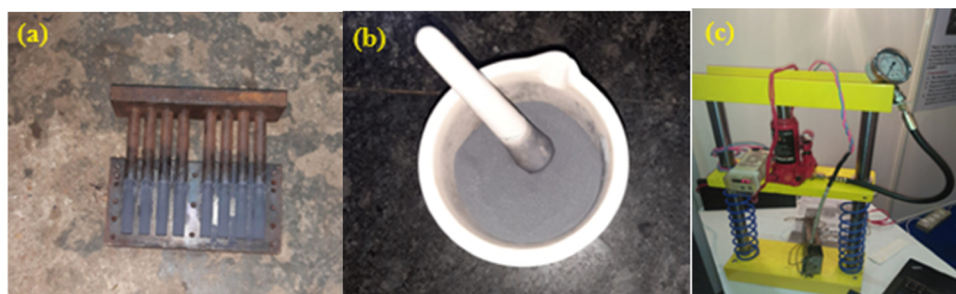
(a) Multicavity die, (b) dry mixing, and (c) hot compression molding setup.
